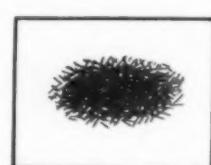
Bull's Eye Fracture of Large Castings.
